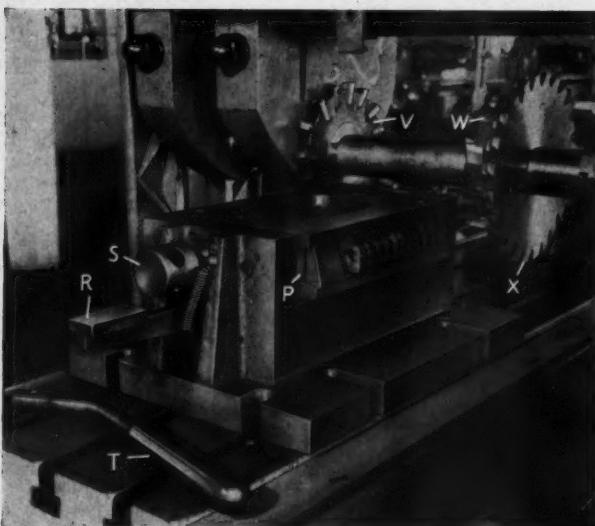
The fixture at one end of the table of a Fritz Werner machine, with a loaded cradle in position. The cradle is located transversely by a key on the lever *R*. For the next stage, the cradle is transferred to a second fixture at the other end of the table
